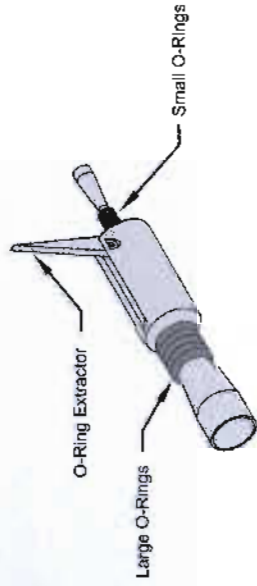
Ultraflow*<sup>TM</sup>\* O-ring tool with large and small O-rings
